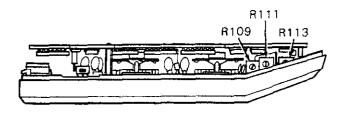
SOLDER SIDE OF A/D BOARD
